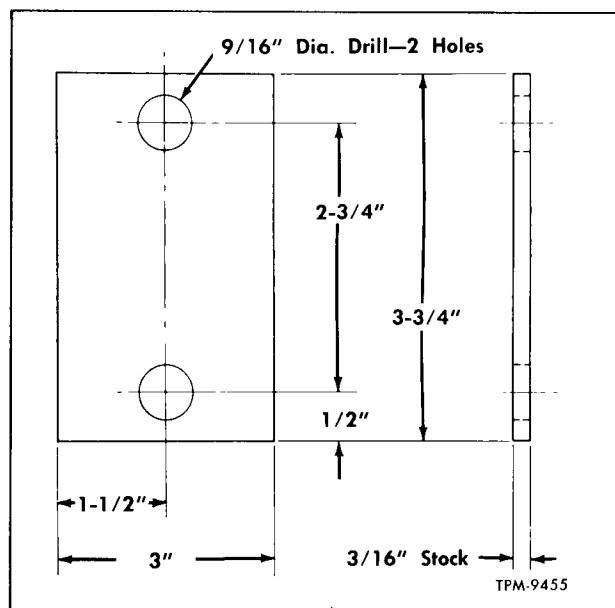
Closure Plates (For Placing Over Compressor Valve Ports)
